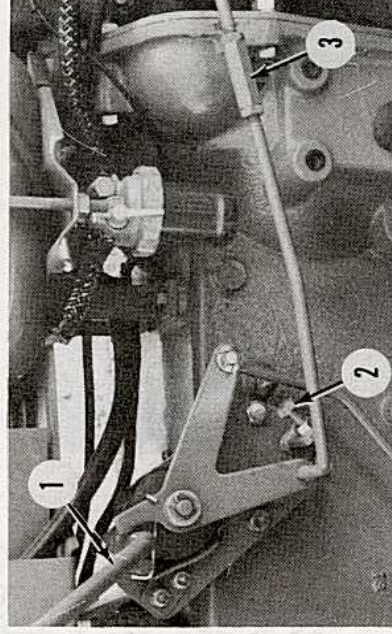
View of throttle linkage typical of 1100, 1110, 1200, 1210 and 1300 models. Refer to text for adjustment procedure.
